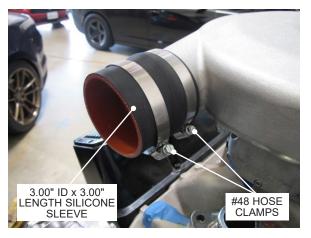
G: Install silicone sleeve to carburetor hat inlet
